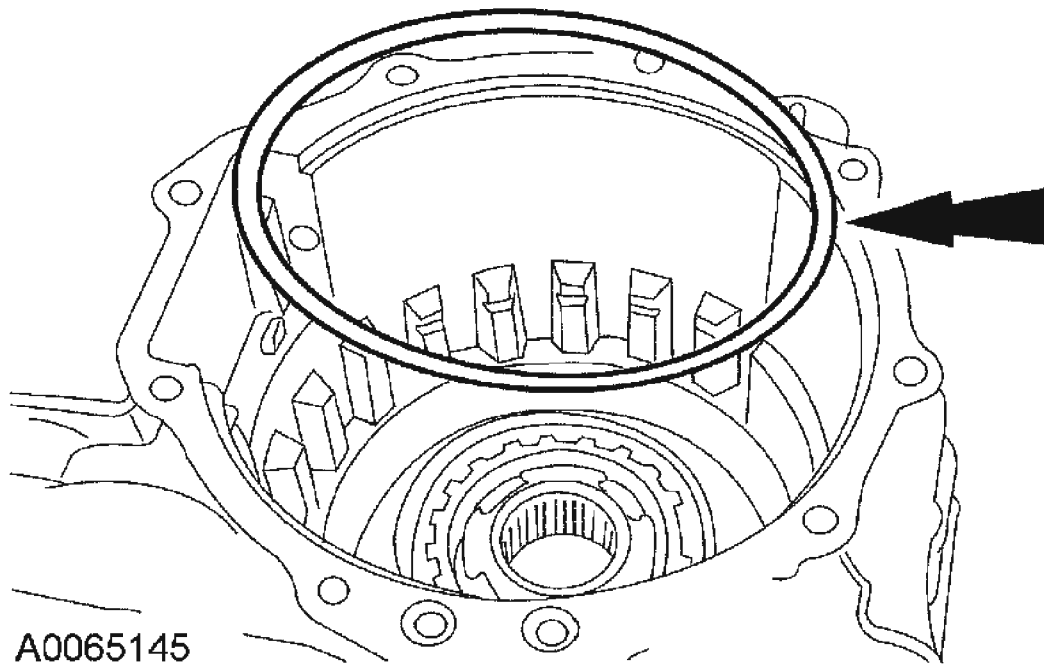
Installing Bevel Ring With Outer Edge Of Beveled Ring Up Towards Top Of Case
